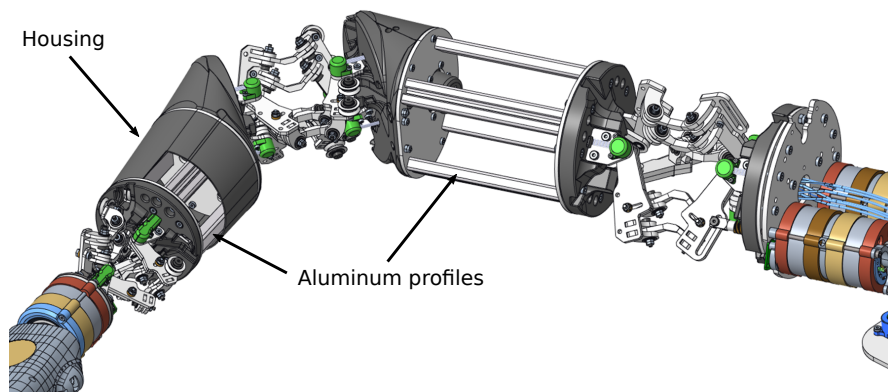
Supporting structure of the arm with aluminum profiles and 3D printed housing.
